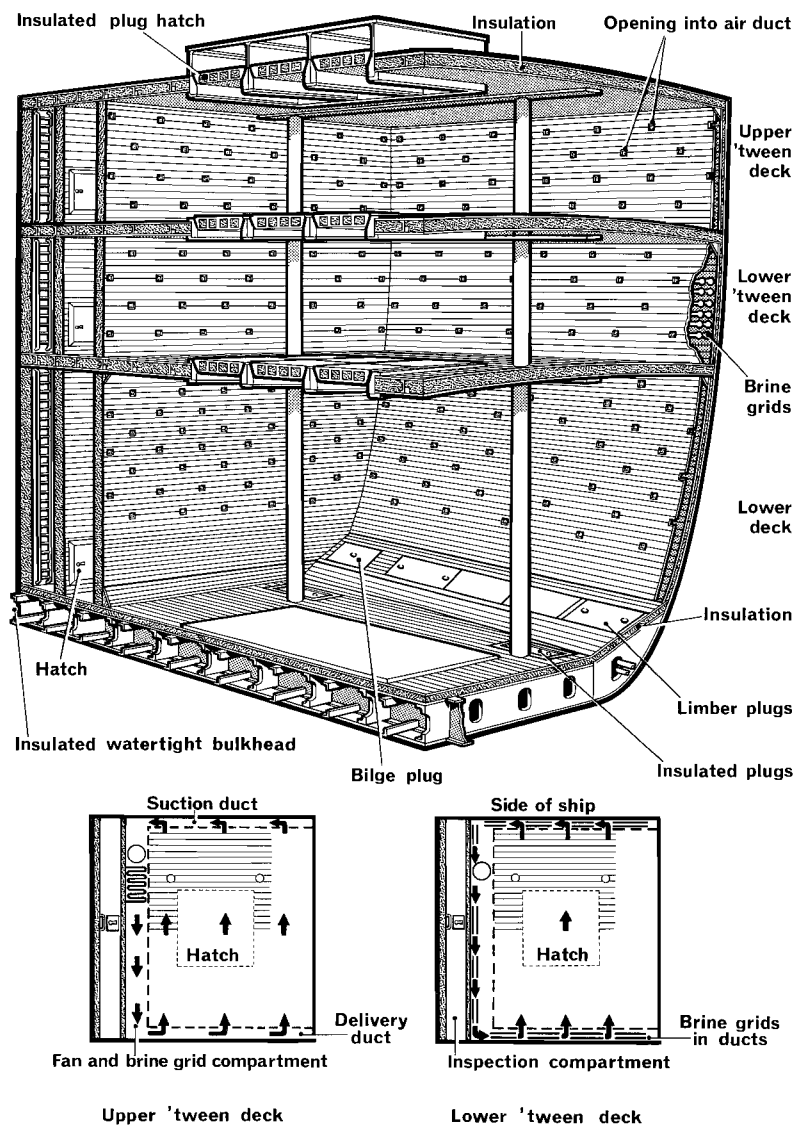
Sectional view of a type of insulated ship showing the insulation, brine pipes and plug hatches. Plan sections of two decks are shown below.
